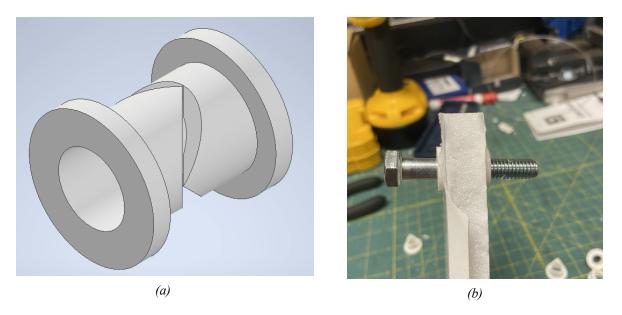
3D printed half-bushing. (a) Two half bushings with sharp points to punch through foam core board that fit together with an adequate distance for the foam core board thickness. (b) Example of the half bushings being used in ¼" foam core board.
